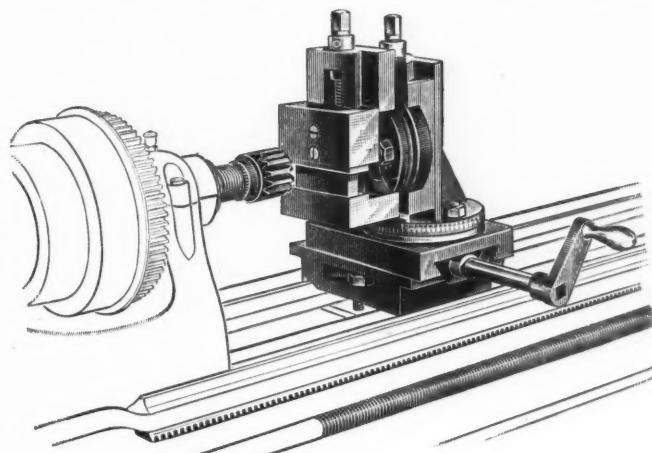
Milling Attachment in Position for Plain Milling Work.
